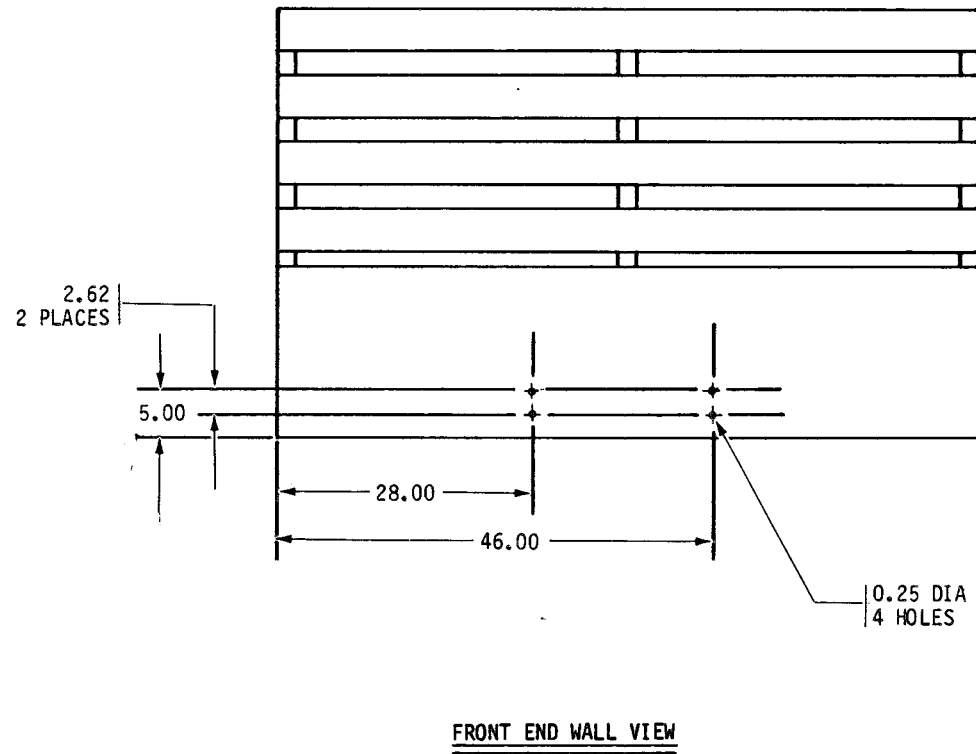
Hole dimensions for blind rivet nuts, unit 4, M105A2.
